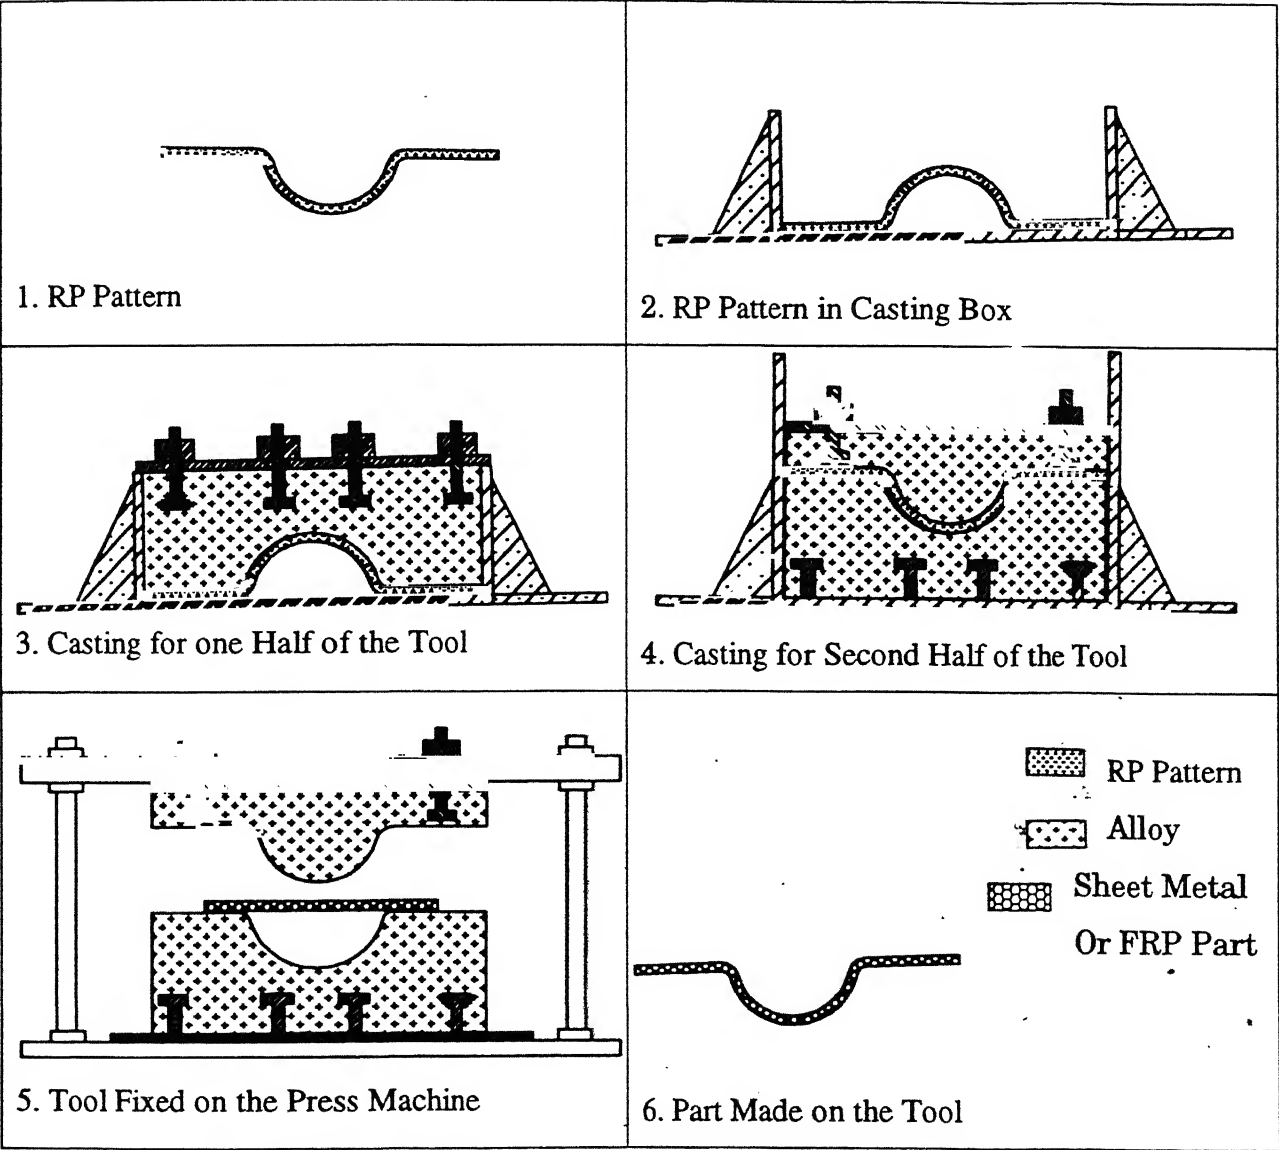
Process of making two-part Press-Tool without using Waxesheet
